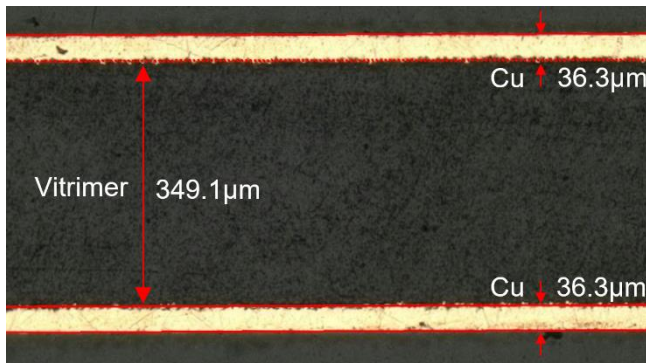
Cross-section of a self-healing RCC manufactured by hot-press molding.
